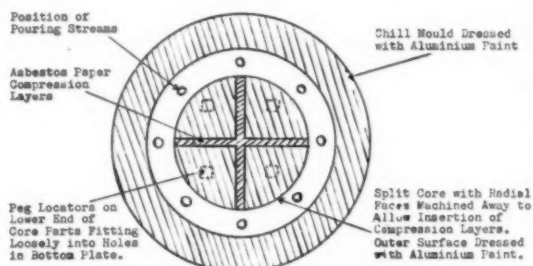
Mould assembly for slow-pouring cored billet with split chill core (Pell-Walpole).
